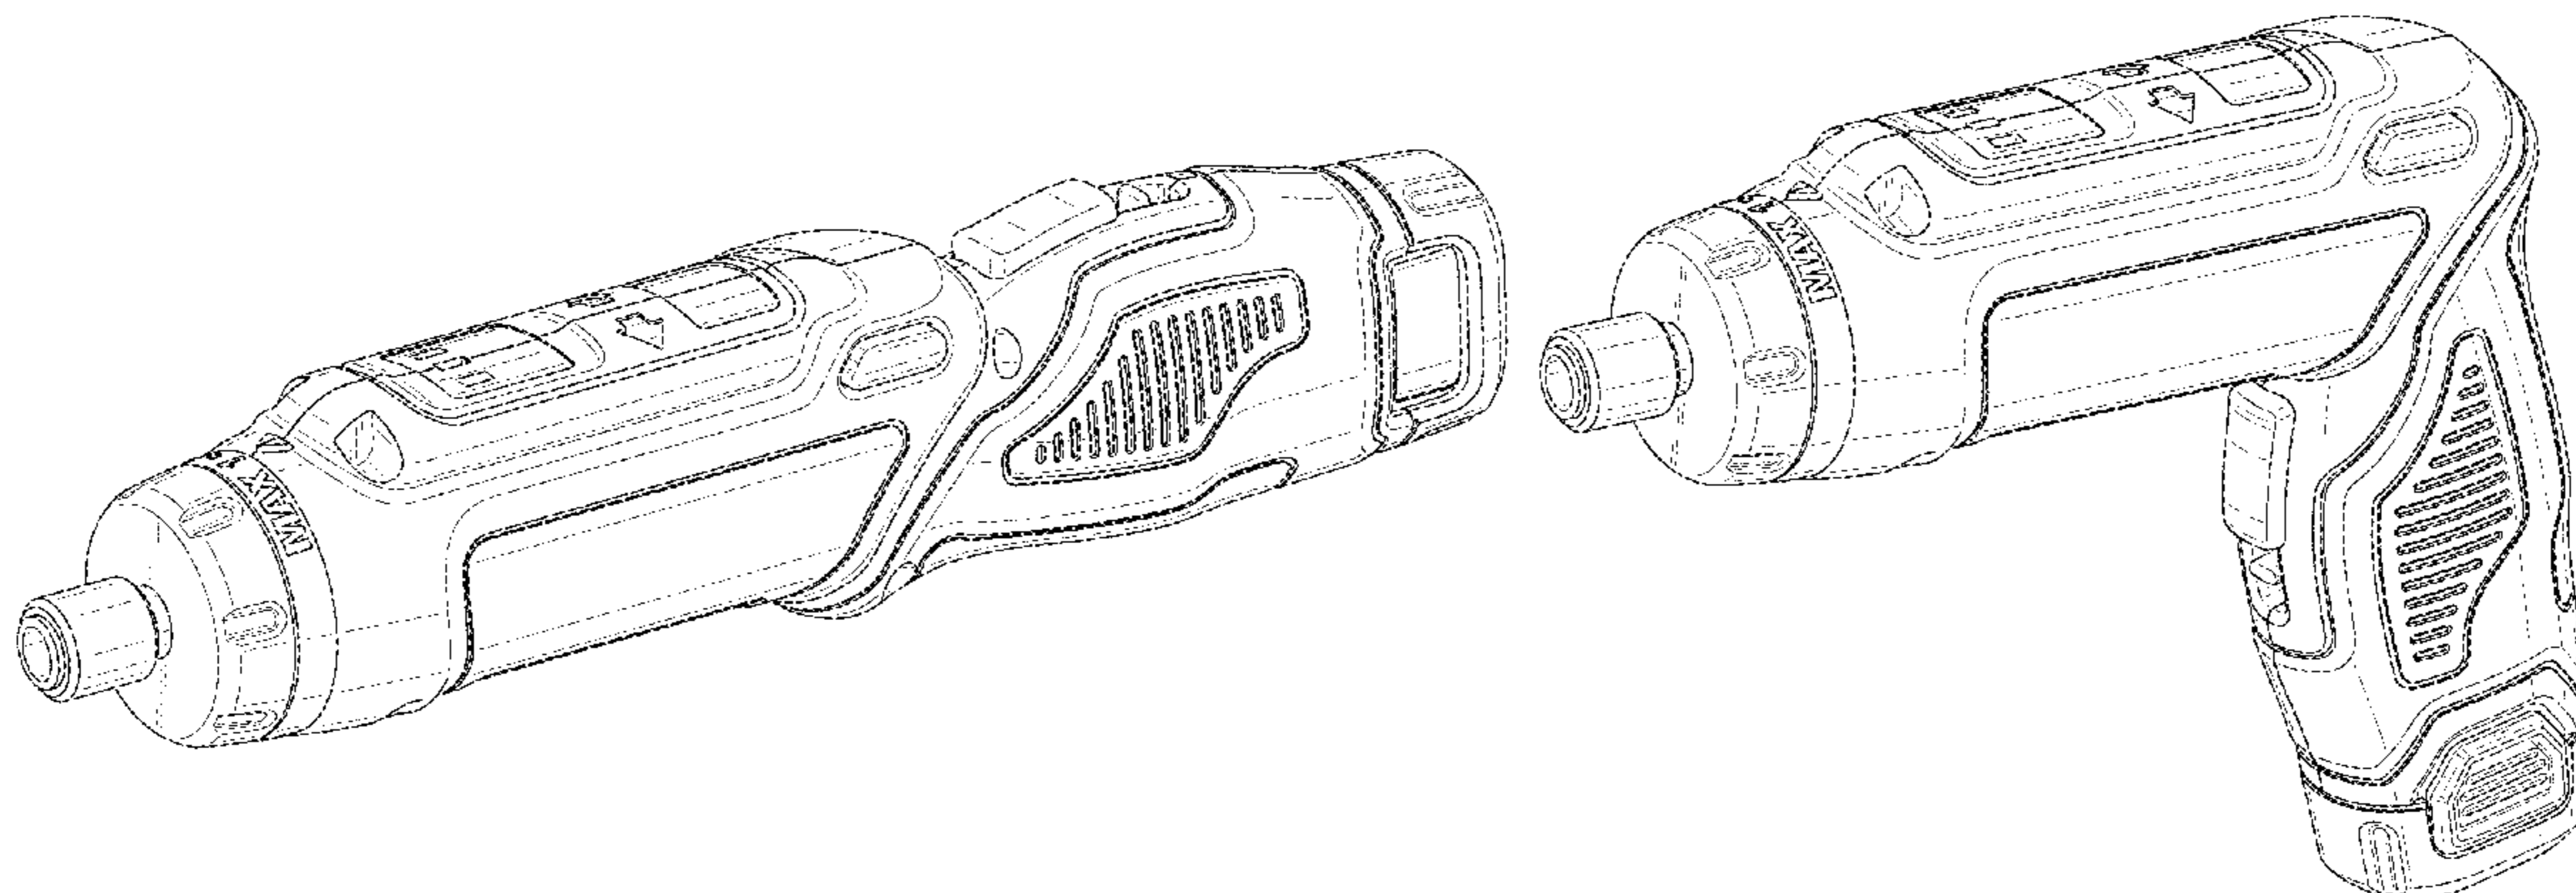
is a right view of the screwdriver of FIG. 8 with the handle positioned in the second configuration.
